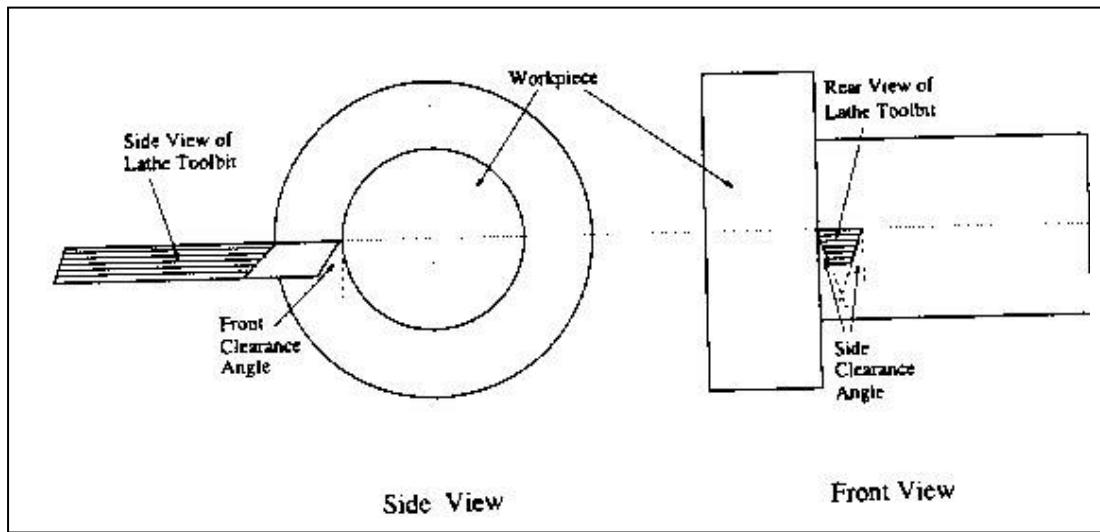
A Lathe Tool Bit with Zero Rake and Zero Back Rake.
